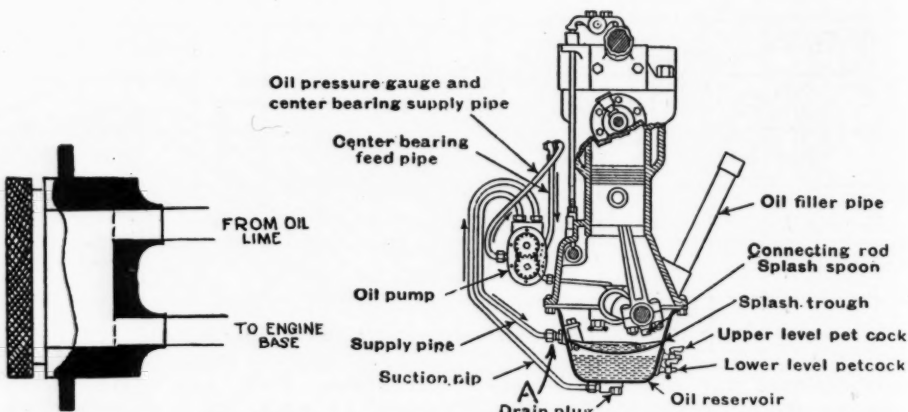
Lubrication system used on 1919 Chevrolet 490
